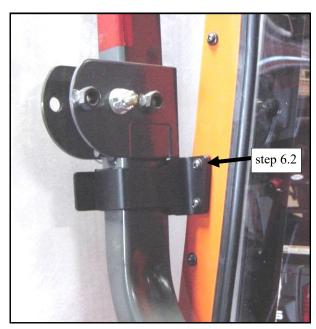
(view of left side of tractor) (lower roll bar mount shown here)
